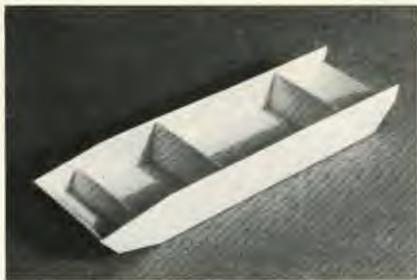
The basic hull assembly includes three internal bulkheads to keep the sides perpendicular.
